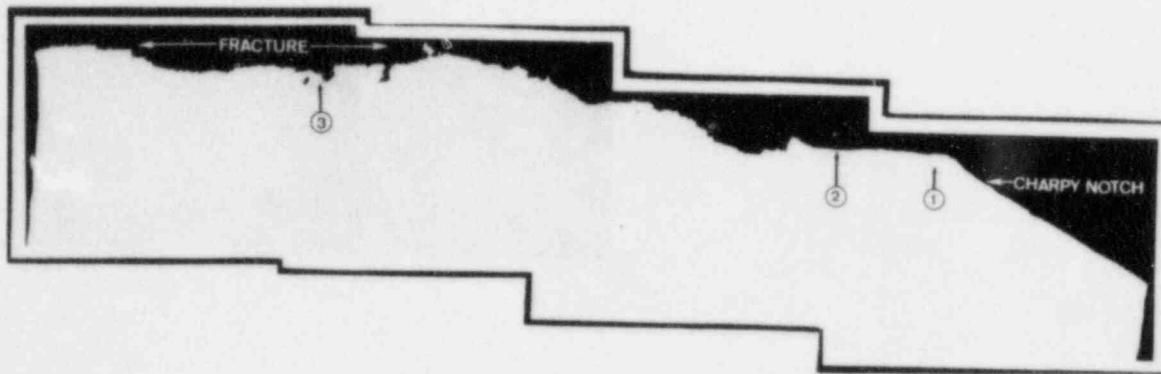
Macroscopic section through the center of a Charpy specimen tested on the upper shelf. The notch is located in a weld pass of type 309 stainless steel; the back side of the specimen is type 308 stainless steel. (Original reduced 7%)
